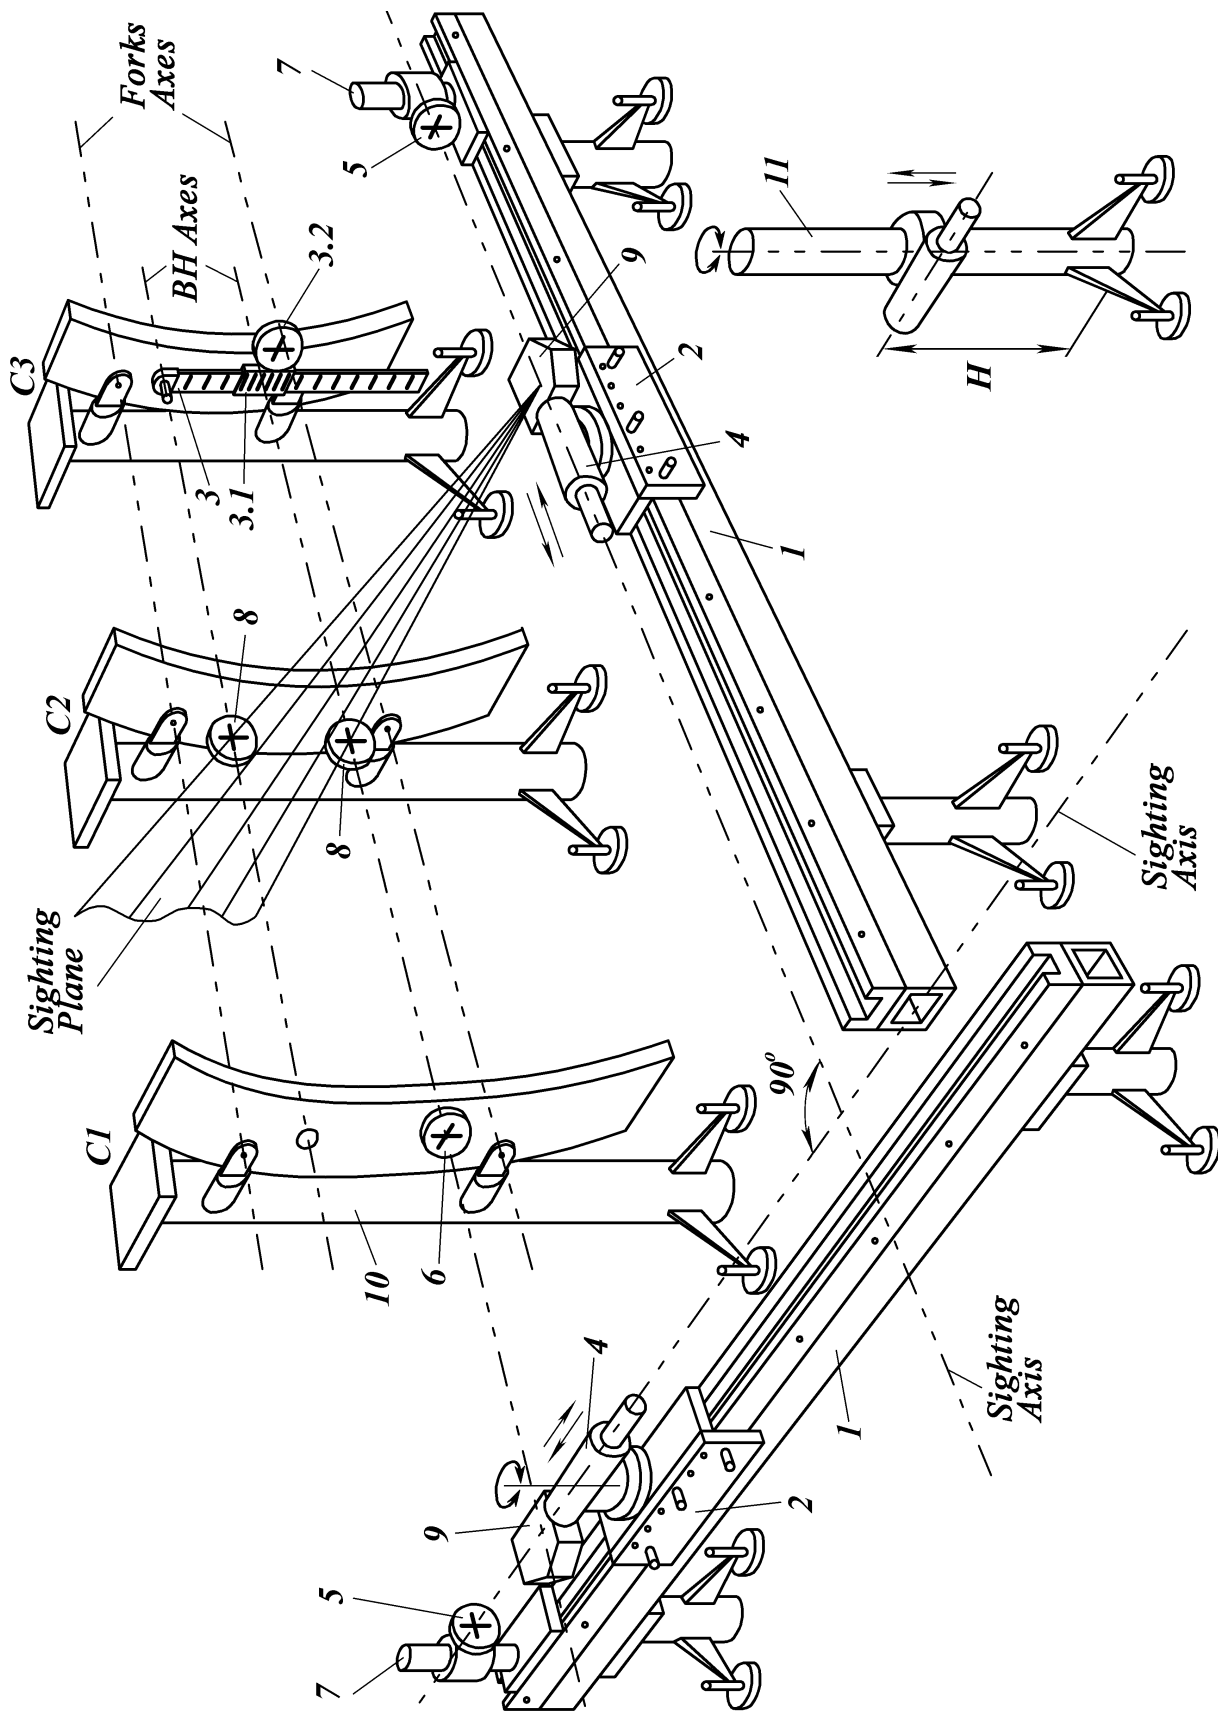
Optomechanical stand: 1 – distance ruler; 2 – distance gage; 3 – vertical ruler (3.1 – vernier, 3.2 – sighting mark); 4 – sighting tube (of the level HT); 5, 6 – sighting marks; 7 – prop; 8 – angle sighting mark; 9 – pentaprism; 10 – mounted object (risers C1, C2, C3 with the fixing arms); 11 – cathetometer B-B-630A
